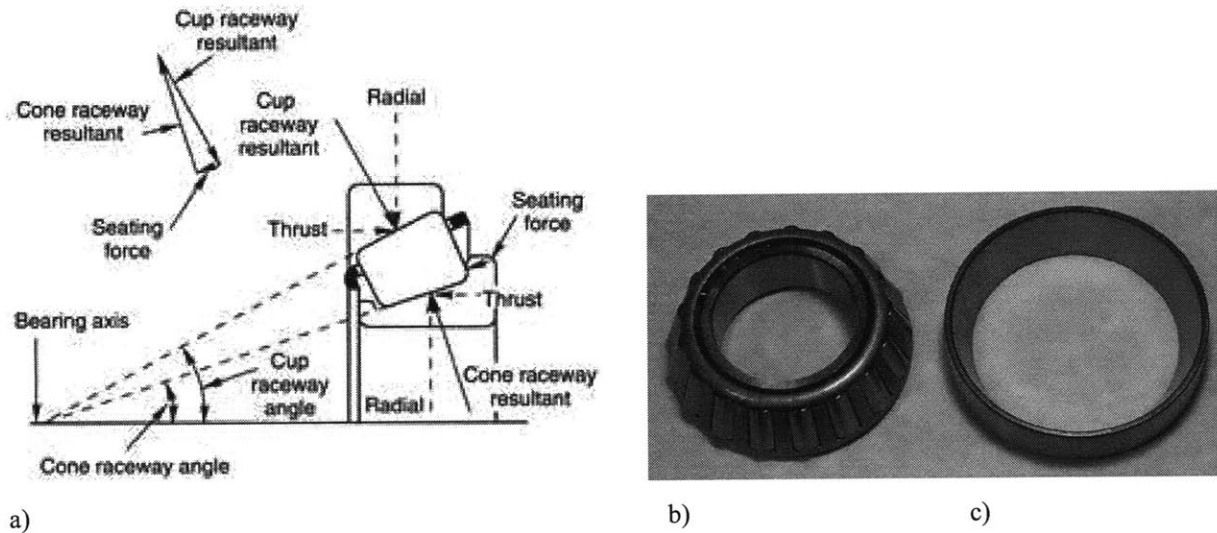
a) cone geometry of tapered roller bearing, b) tapered roller bearing cone, c) cup.
